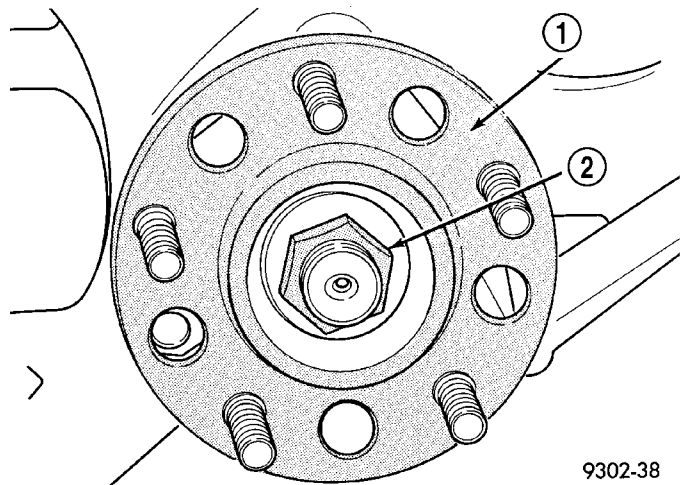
Hub And Bearing To Stub Axle Retaining Nut
